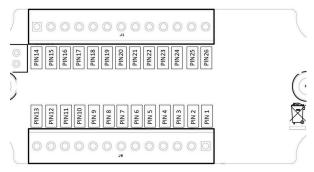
RAK2560 WisNode Probe IO PCBA pin definition
